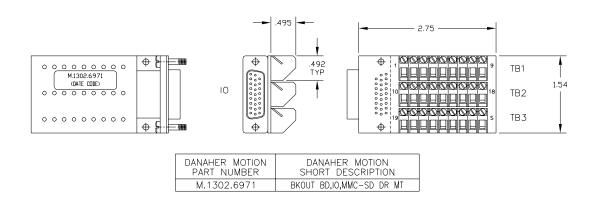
Drive I/O Port Breakout Board Dimensions
